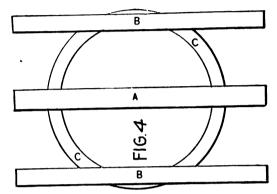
Upper carriage part, fifth-wheel plate and cross bars
